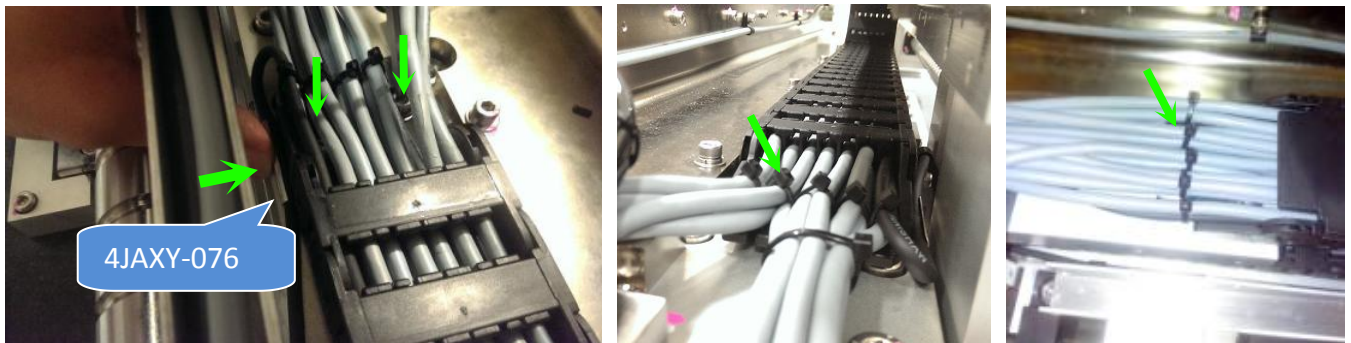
Stepper Motor Cable Routing (X Axis E-Chain)
